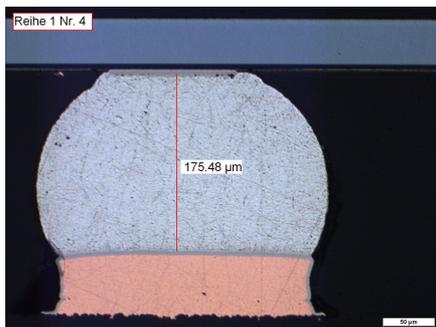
Cross section of a solder ball: epc600 on top of a fine-line PCB
